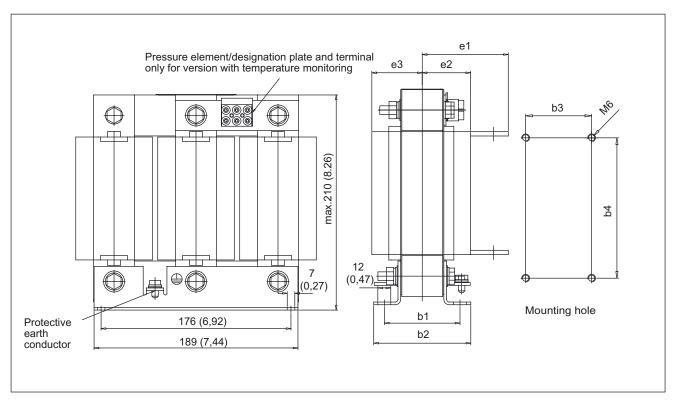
Dimension drawing: Motor reactor, frame size FSD
